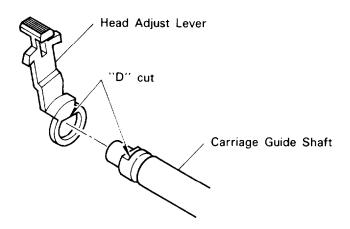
Carriage Guide Shaft and Head Adjust Lever
